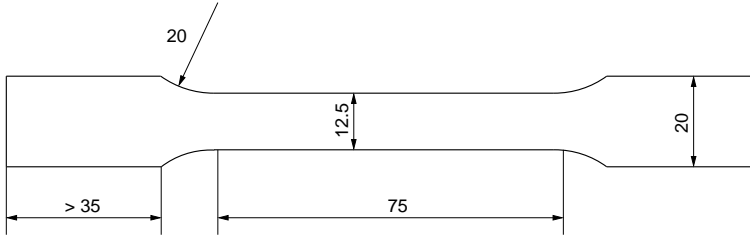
Geometry of the tensile test specimen (dimensions in mm).
